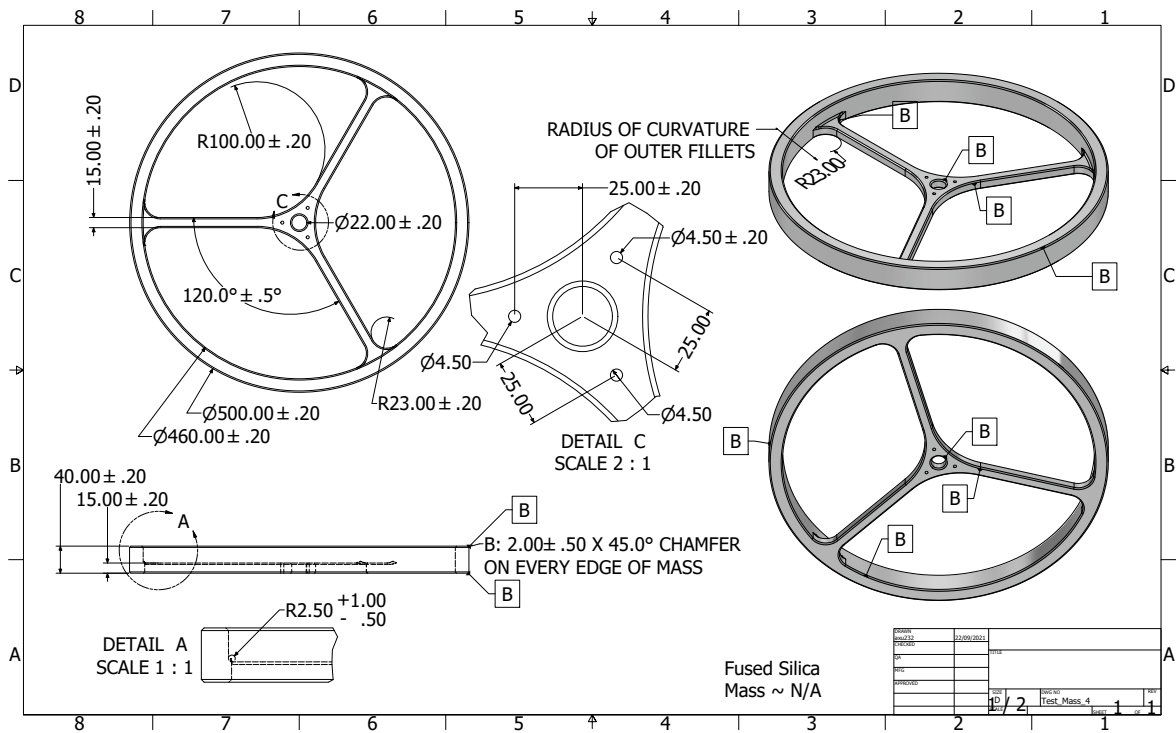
Drawing provided to Heraeus for manufacturing the fused silica compact 6D test mass.
